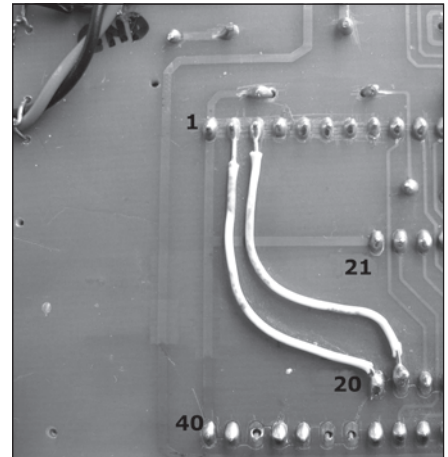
The additional connections on the PCB of the voltmeter (see text).
